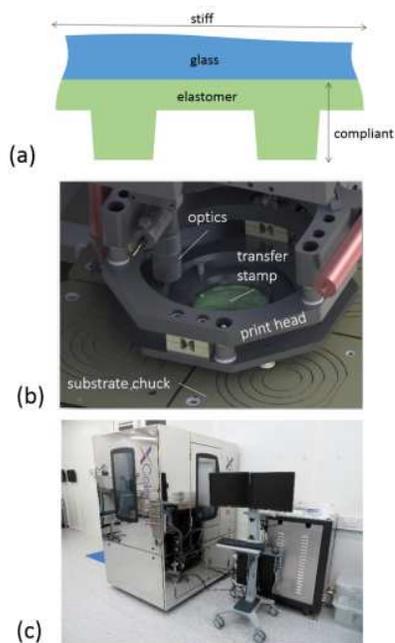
(a) cross-section illustration of a transfer stamp and (b) an image showing how the stamp is integrated into the print head and (c) a photograph of the print tool at Tyndall National Institute in Cork, Ireland.
